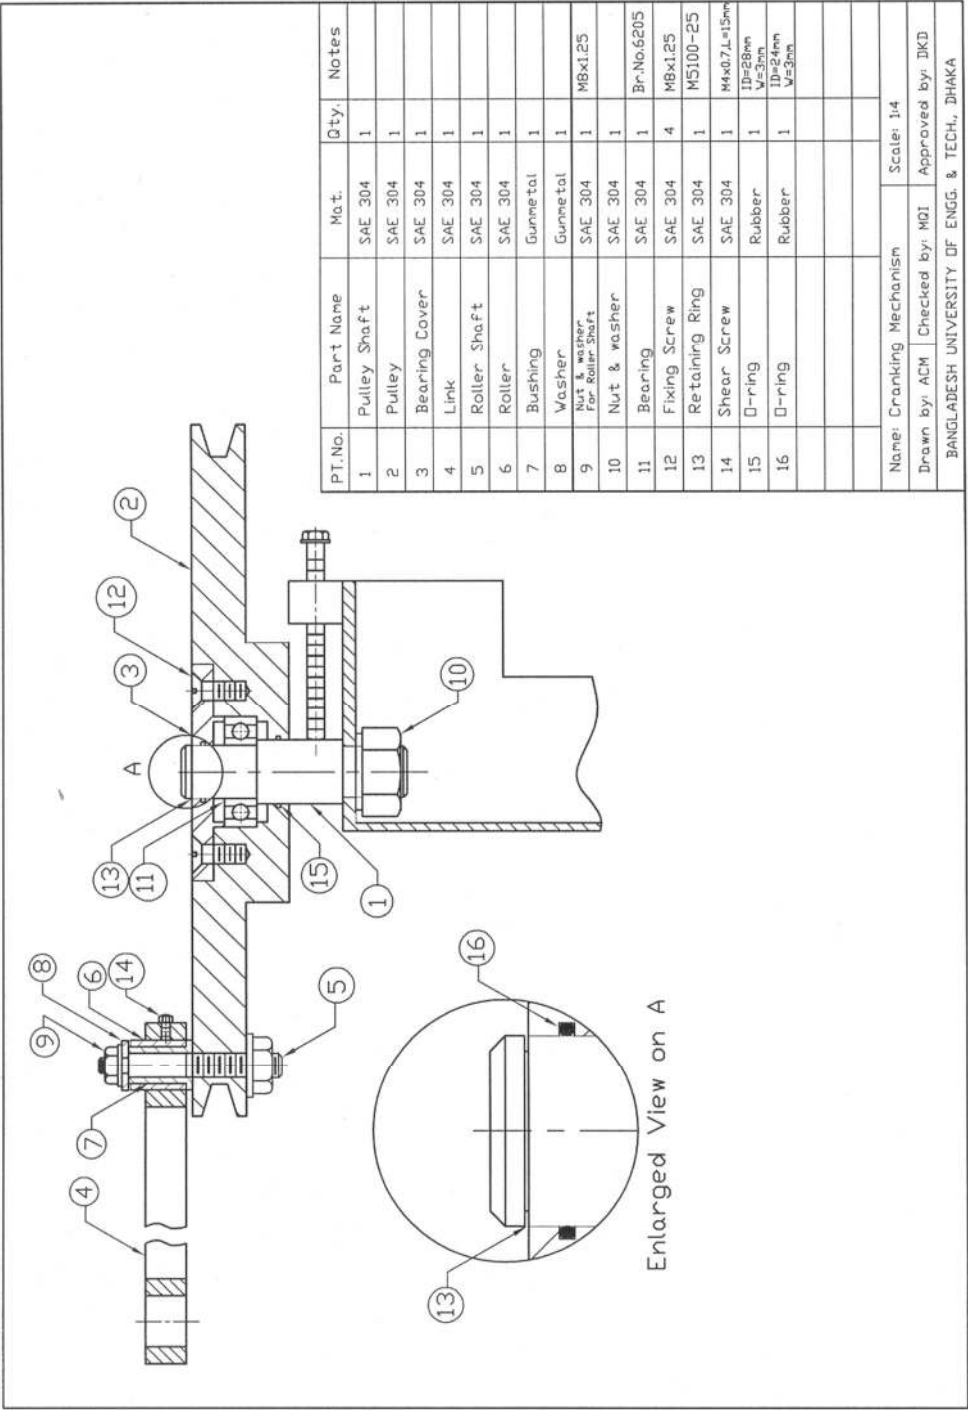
Assembly Drawing of Cranking Mechanism
